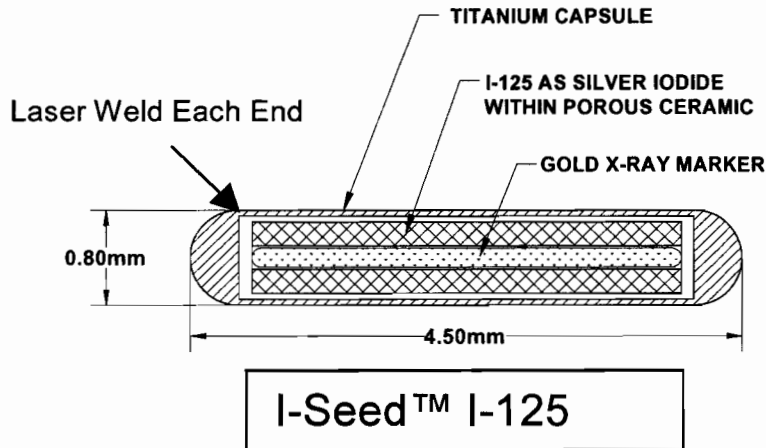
I-Seed Model I25.S06, cross sectional view
